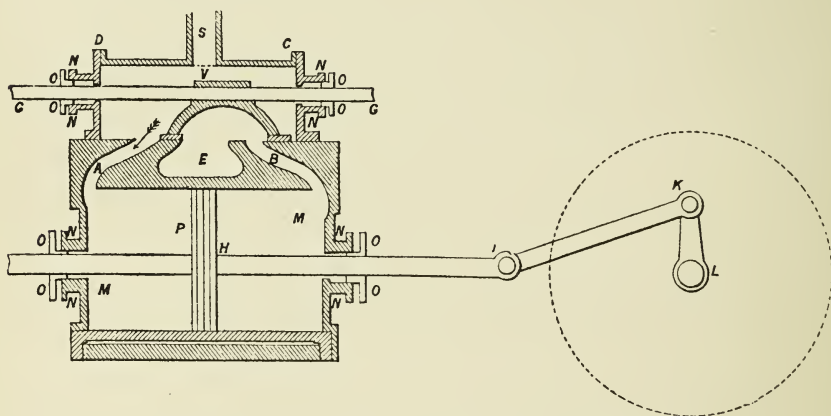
ILLUSTRATING THE ACTION OF A WINDING ENGINE.
